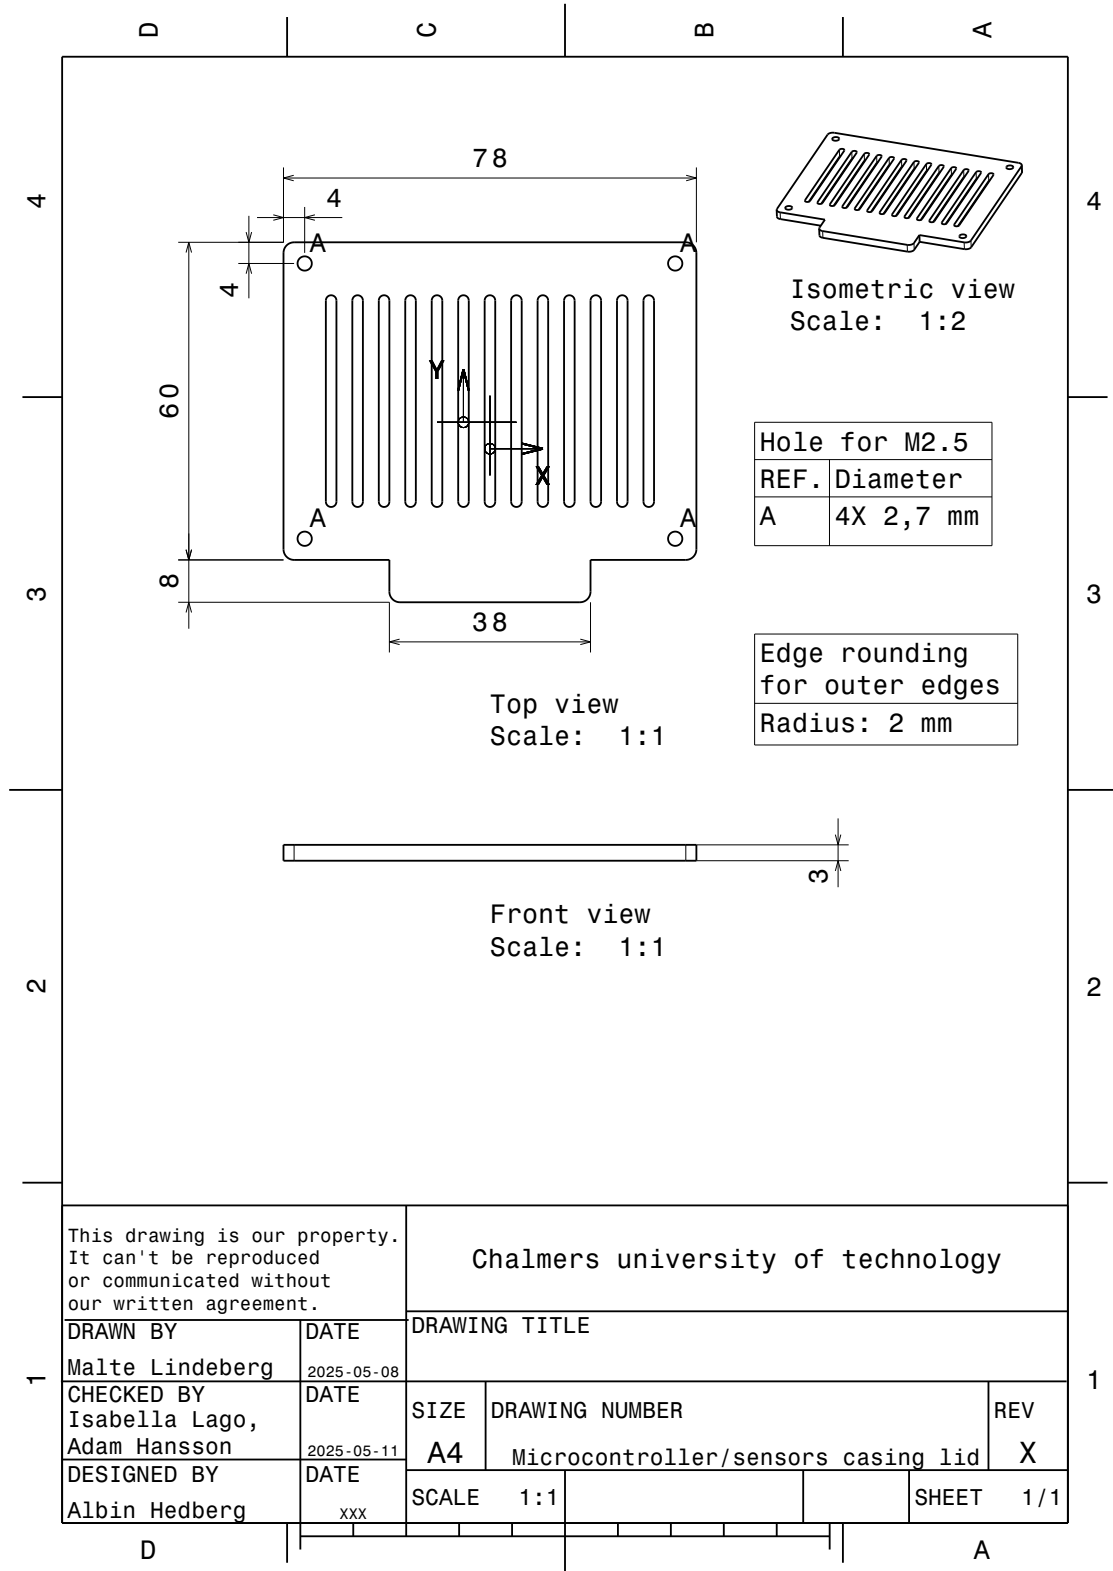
Microcontroller/sensors casing lid CAD drawing.
